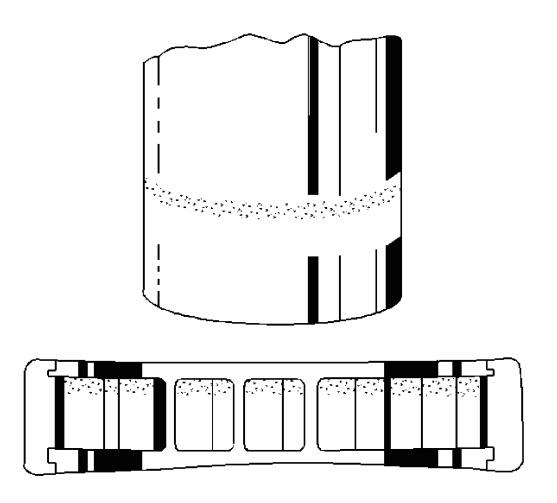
Identifying Single Edge Pitting Courtesy of GENERAL MOTORS CORP.
